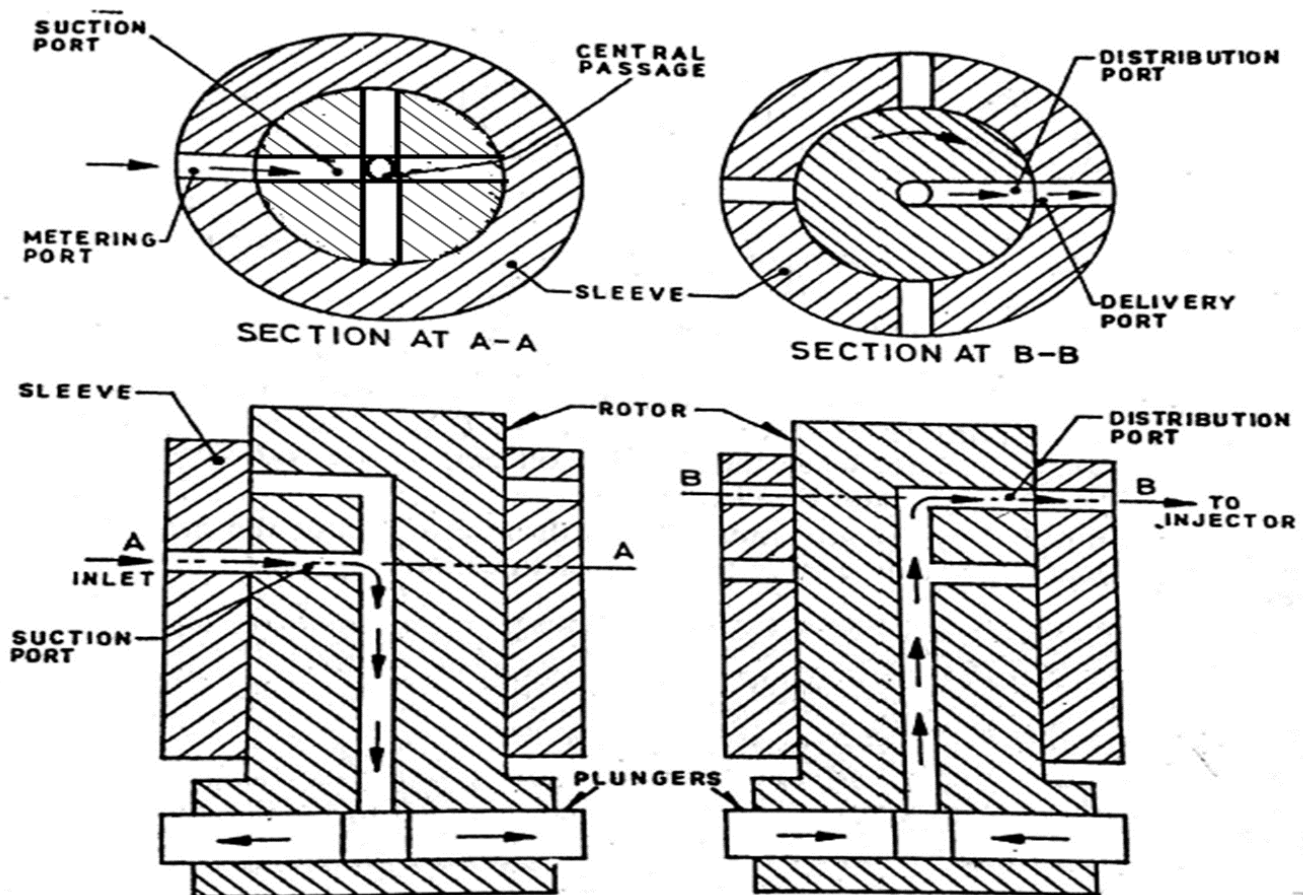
Principle of working of distributor type fuel injection pump.
